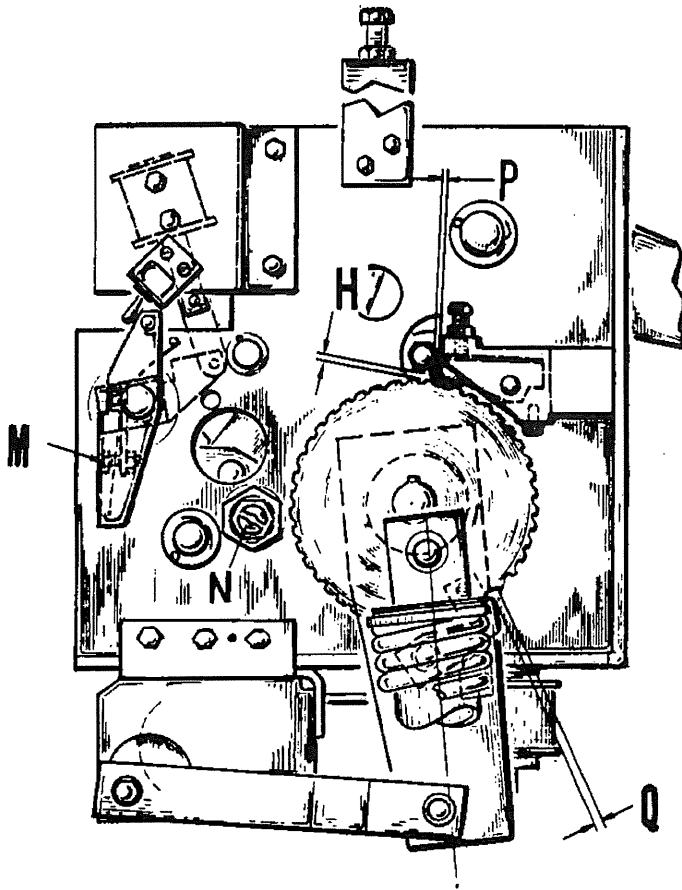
Right Side View Adjustment and Final Clearance Checks
